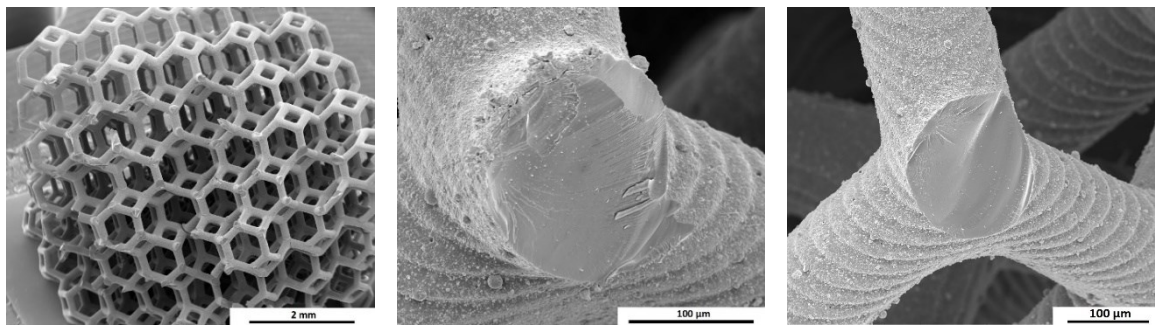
Fracture surfaces of a pyrolysed SiOC printed structure (RC 711/H44 = 5/5).
